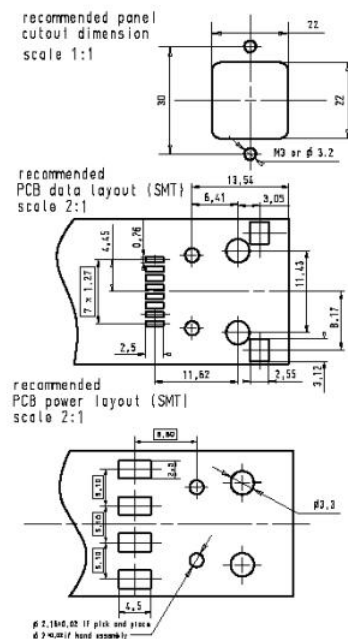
PROFInet hybrid plug connector printed circuit board adaptation
